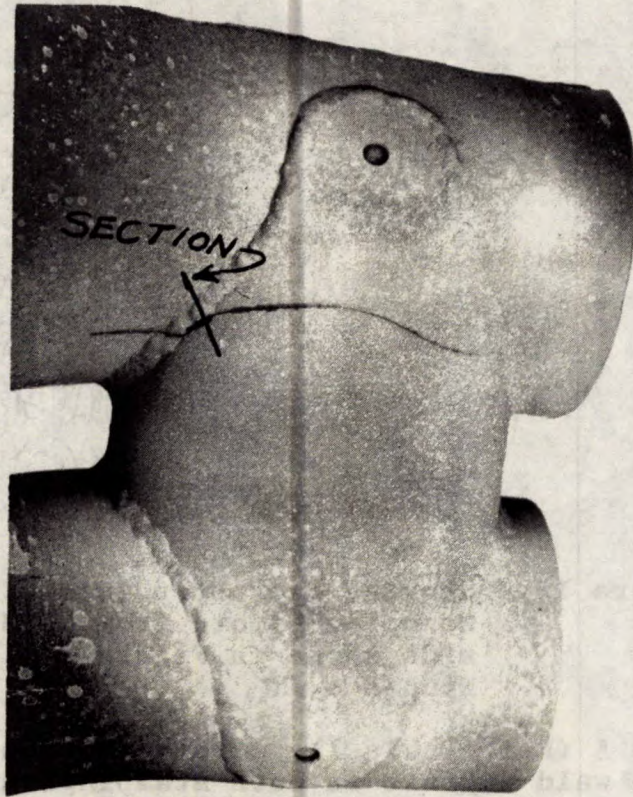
Sample B, after sand blasting and penetrant inspection, showing path of cracking. Approx. 1/2 size.
